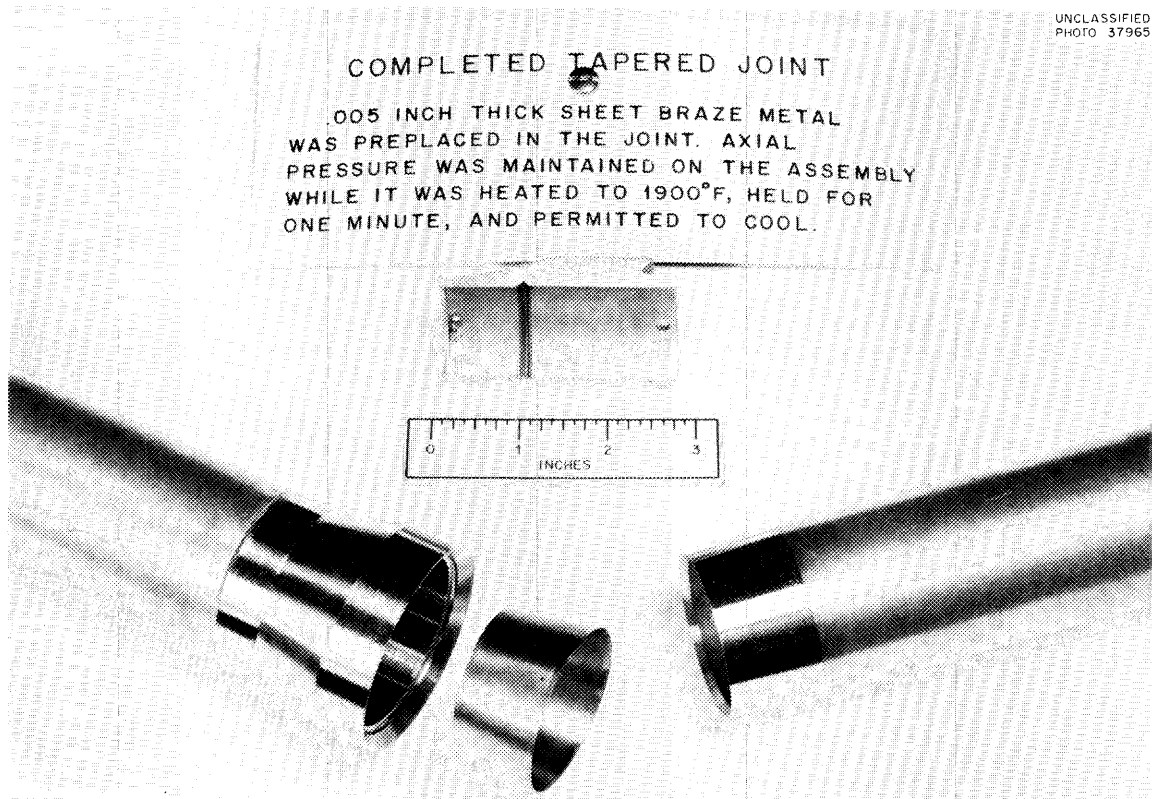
Brazed Pipe Joint, Showing the Sectioned, Completed Joint (Above) and Starting Materials (Below).
